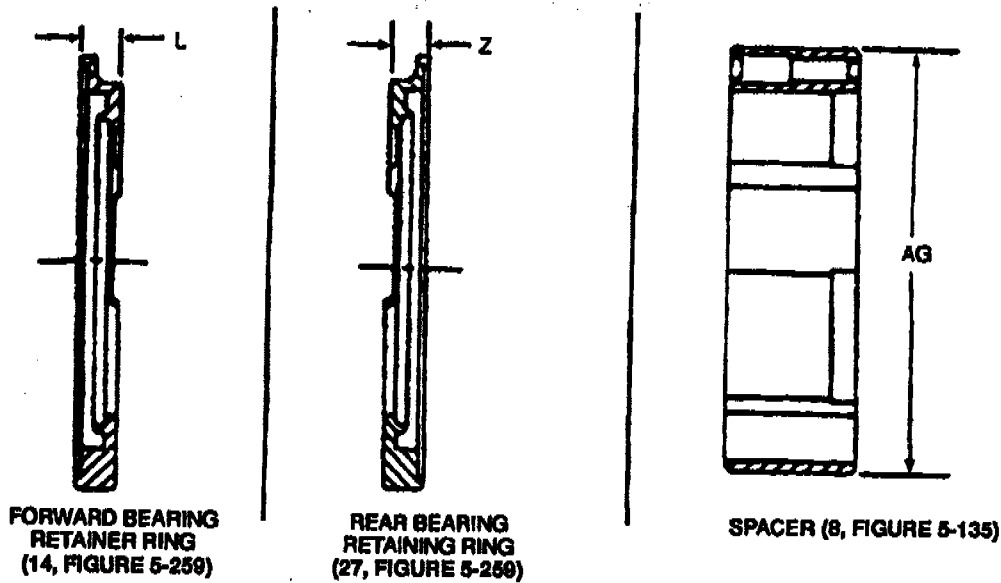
Power Turbine Rotor and Bearing Housing Assembly Inspection Locations (Sheet 4 of 4).
